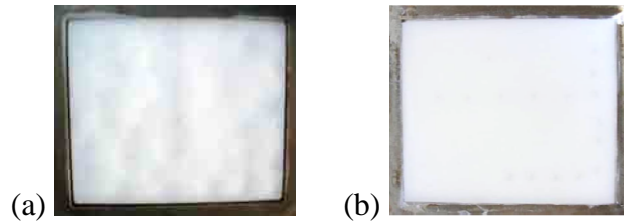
Wavy and smooth surface of the sheets produced from (a) 6 and (b) 5mm moulds.
